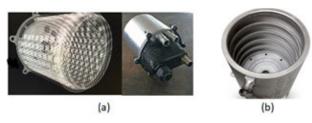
Two concept designs of liquid cooling jacket integrated into the housing and built by AM technology for racing car motor (a) TU fast racing team prototype [58], and (b) Greenteam Stuttgart prototype [59], and [60].
